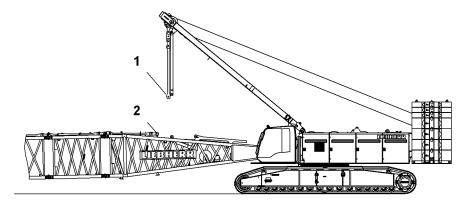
Bolting the equalizer on A-frame 1 to the main boom pendant straps
